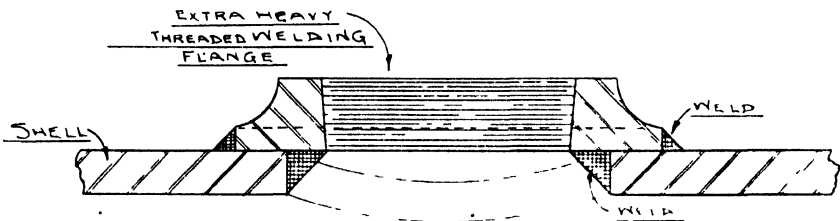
Typical welding details for screwed piping connection on storage heater.
